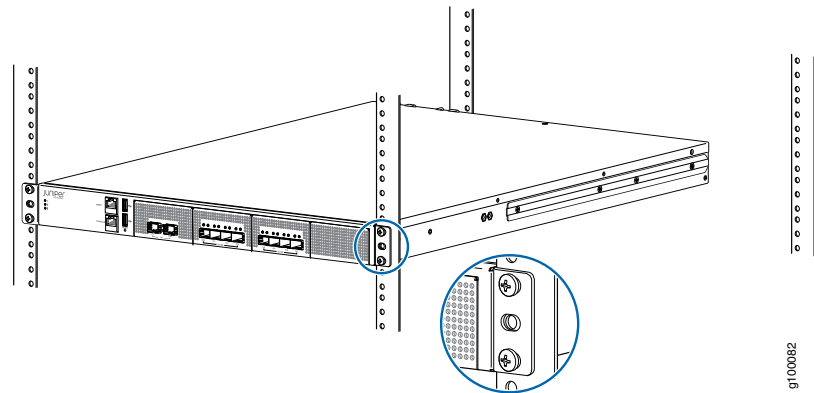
Attaching the Mounting Ears and Fixed Brackets
